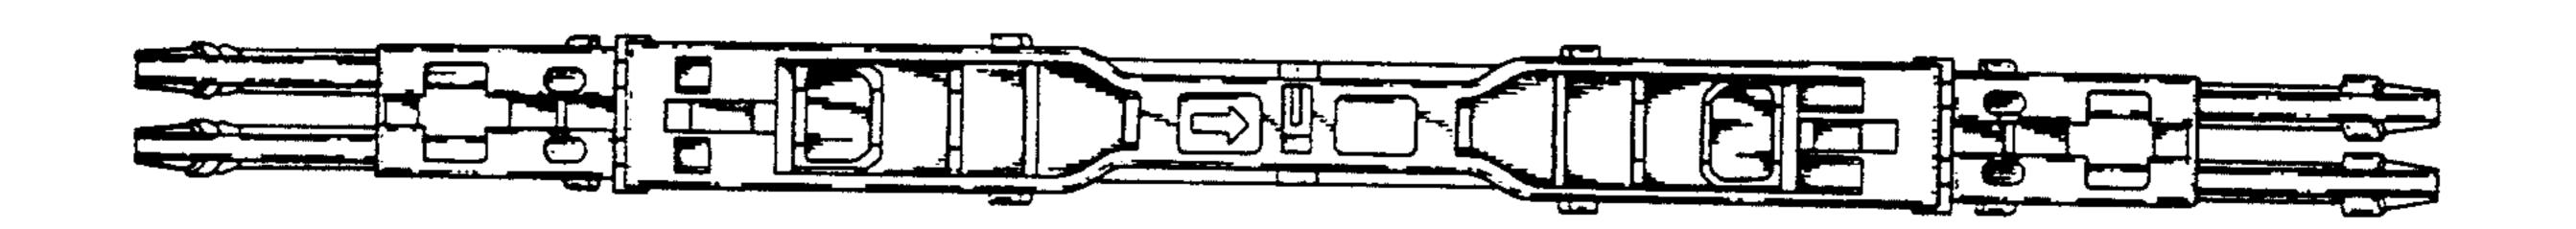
is a slightly enlarged top plan view of FIG. 6;
